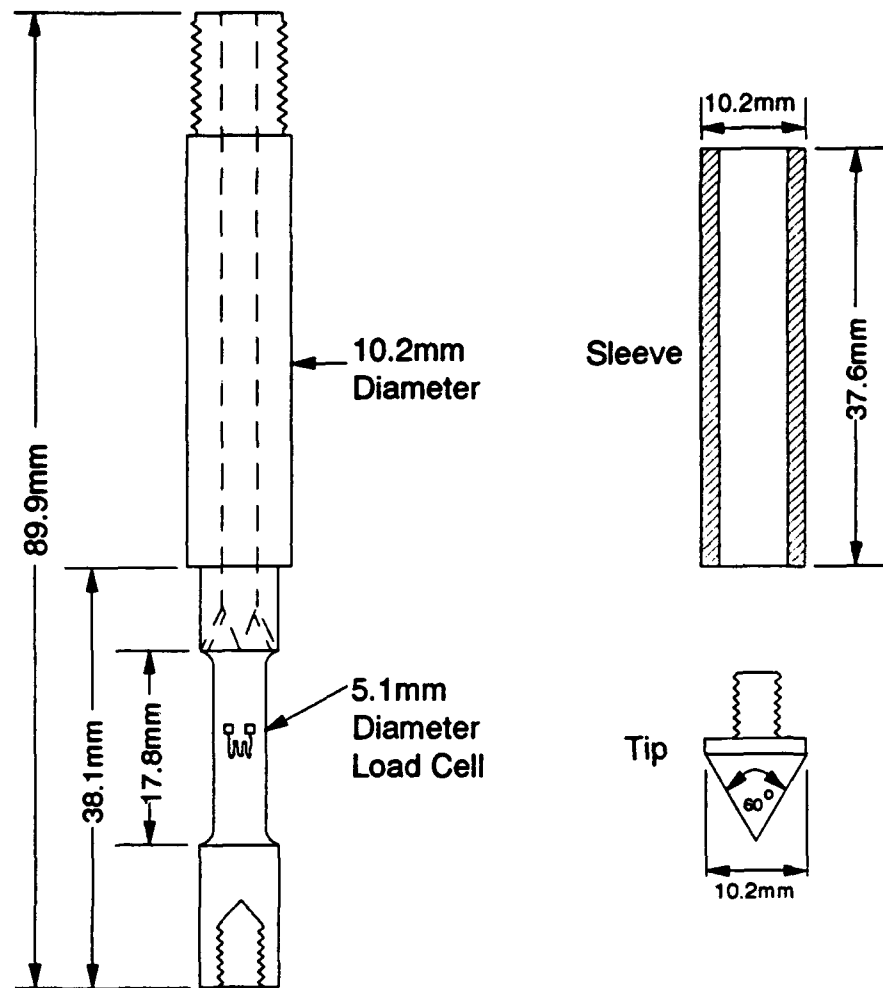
Disassembled View of the 10.2-mm Cone Penetrometer used in Laboratory Testing.
